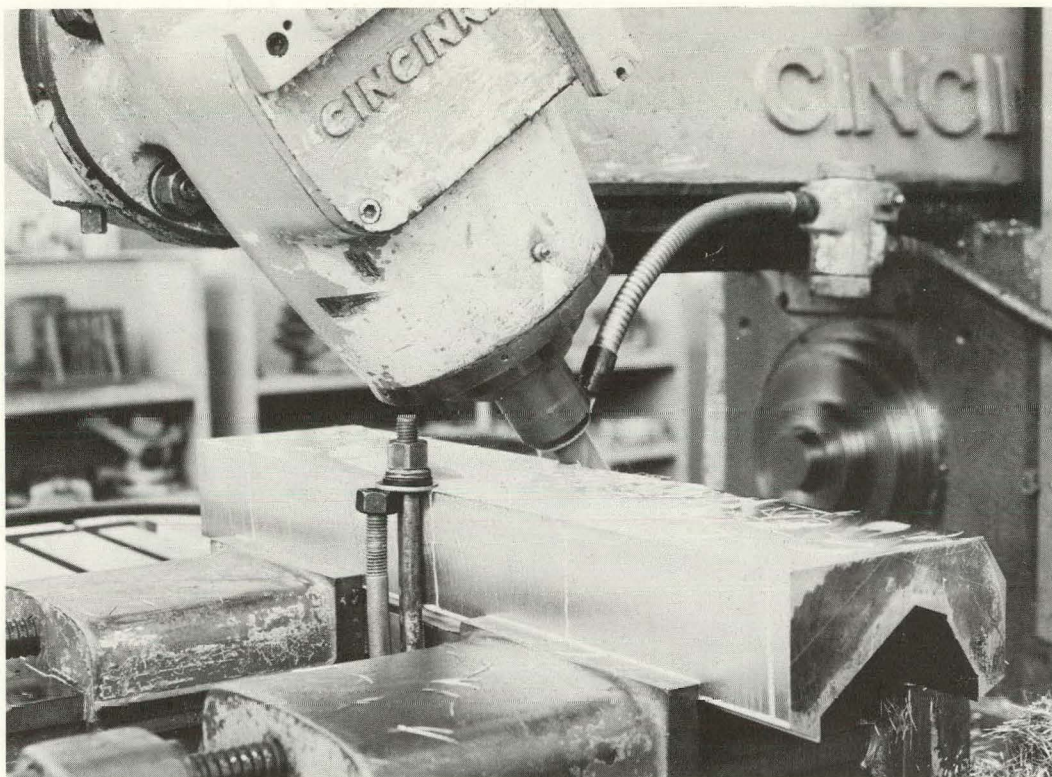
Machining Water Manifold for 70-Tube Panel
